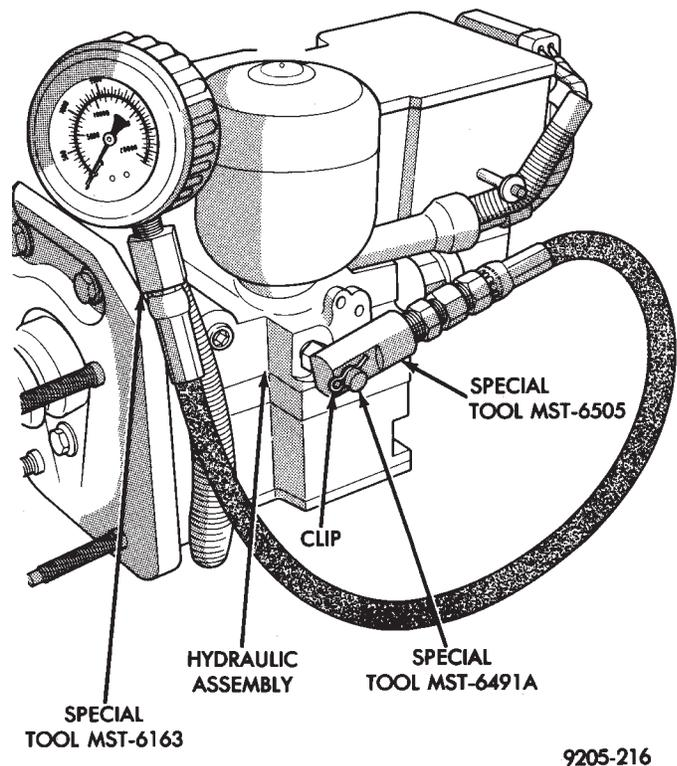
Pressure Gauge and Adapter Installed on Hydraulic Assembly
